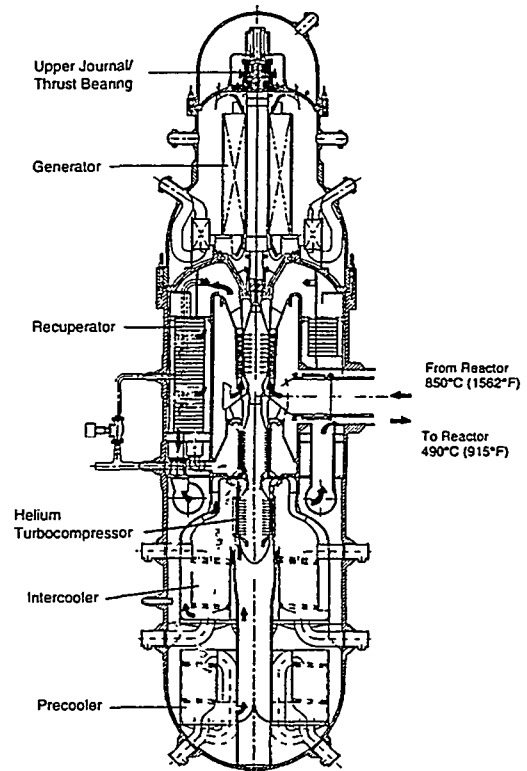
GT-MHR POWER CONVERSION VESSEL ASSEMBLY
